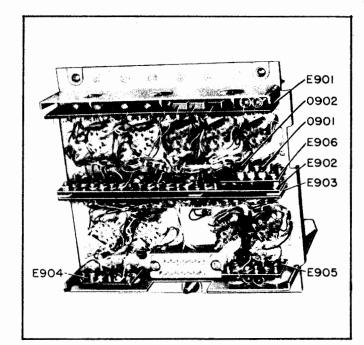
Diversity Selector Unit Chassis, Bottom View
